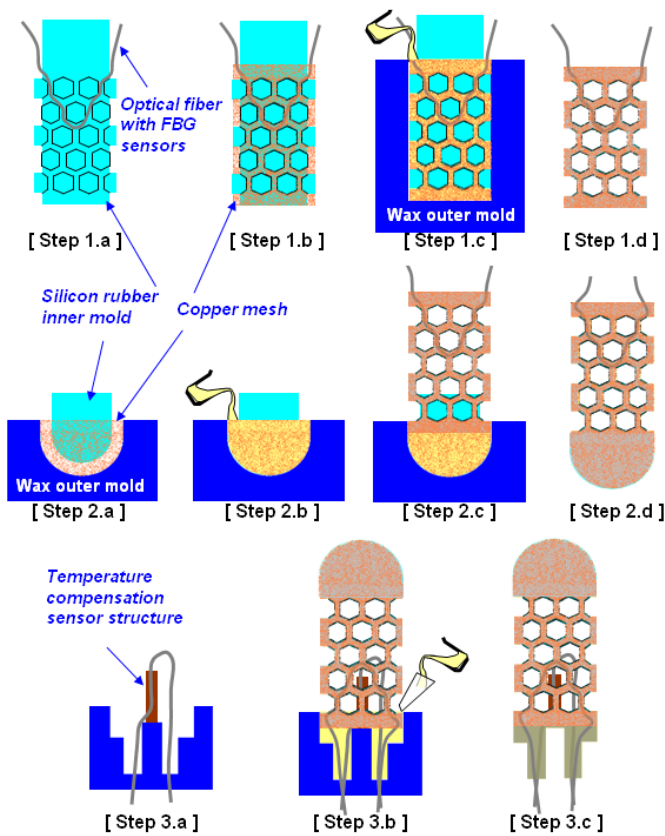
Modified SDM fabrication process: [Step 1] Shell fabrication (a) Prepare silicone rubber inner mold and place optical fibers with FBG sensors (b) Wrap the inner mold with copper mesh (c) Enclose inner mold and copper mesh with a wax outer mold and pour liquid polyurethane (d) Remove inner and outer molds when polyurethane cures. [Step 2] Fingertip fabrication (a) Prepare inner and outer molds and place copper mesh (b) Cast liquid polyurethane (c) Place cured shell into the uncured polyurethane (d) Remove molds when the polyurethane cures. [Step 3] Joint fabrication (a) Prepare outer mold and place temperature compensation sensor structure (b) Place cured shell and fingertip into the uncured polyurethane (c) Remove outer mold when polyurethane cures.
